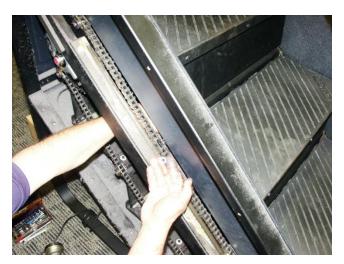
Push the Shaft Through the Chain and Catch the Inboard Flat Washer
